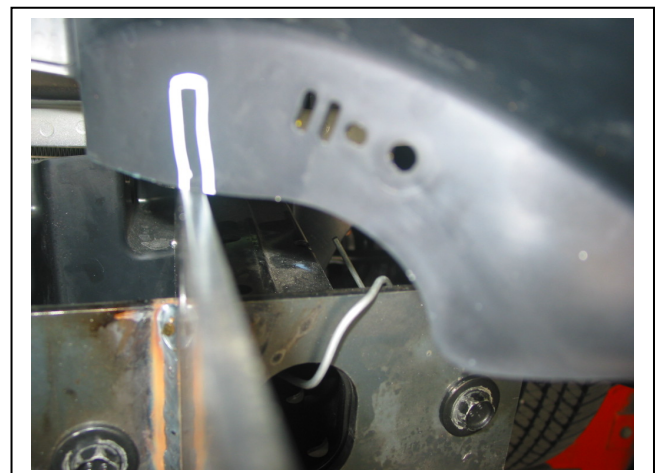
Use original equipment bolts in front of chassis. CAUTION: front of chassis rails may need to be adjusted to ensure correct fit.
